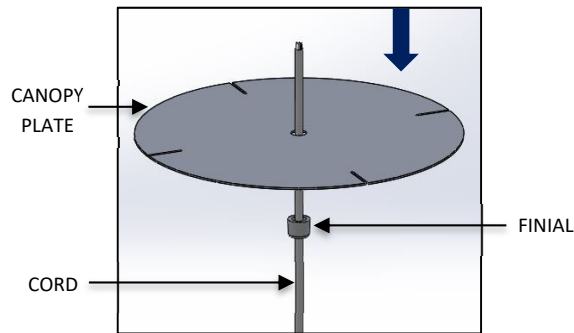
CANOPY PLATE AND FINIAL INSTALLATION
